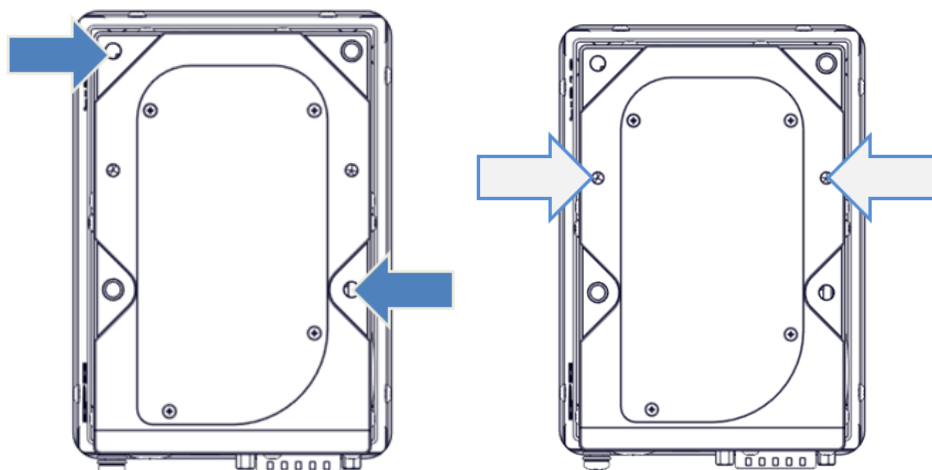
Underside view: Position of the threaded hole for mounting the positioner from below (left); position of the holes for locating pins (right)
